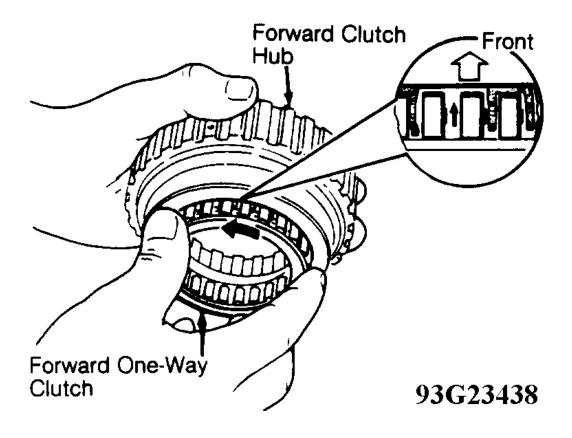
Checking Forward One-Way Clutch Rotation Courtesy of NISSAN MOTOR CO., U.S.A.
